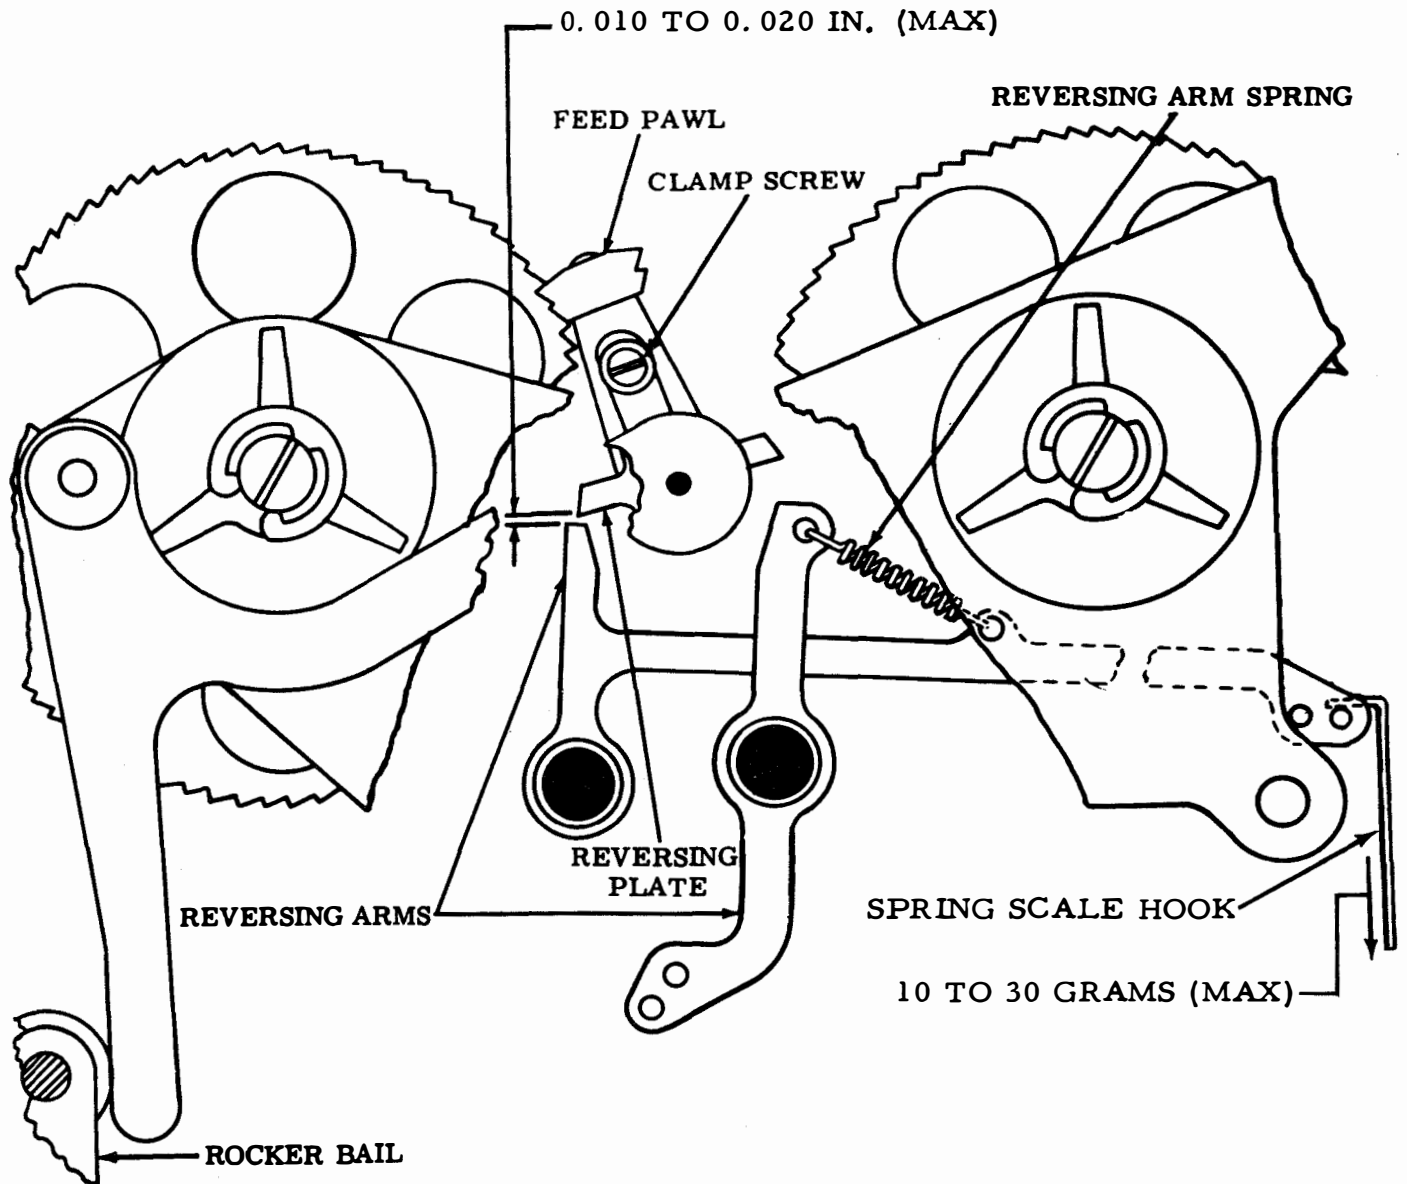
Ribbon Reversing Plate and Ribbon-Feed Reversing Arm Spring
